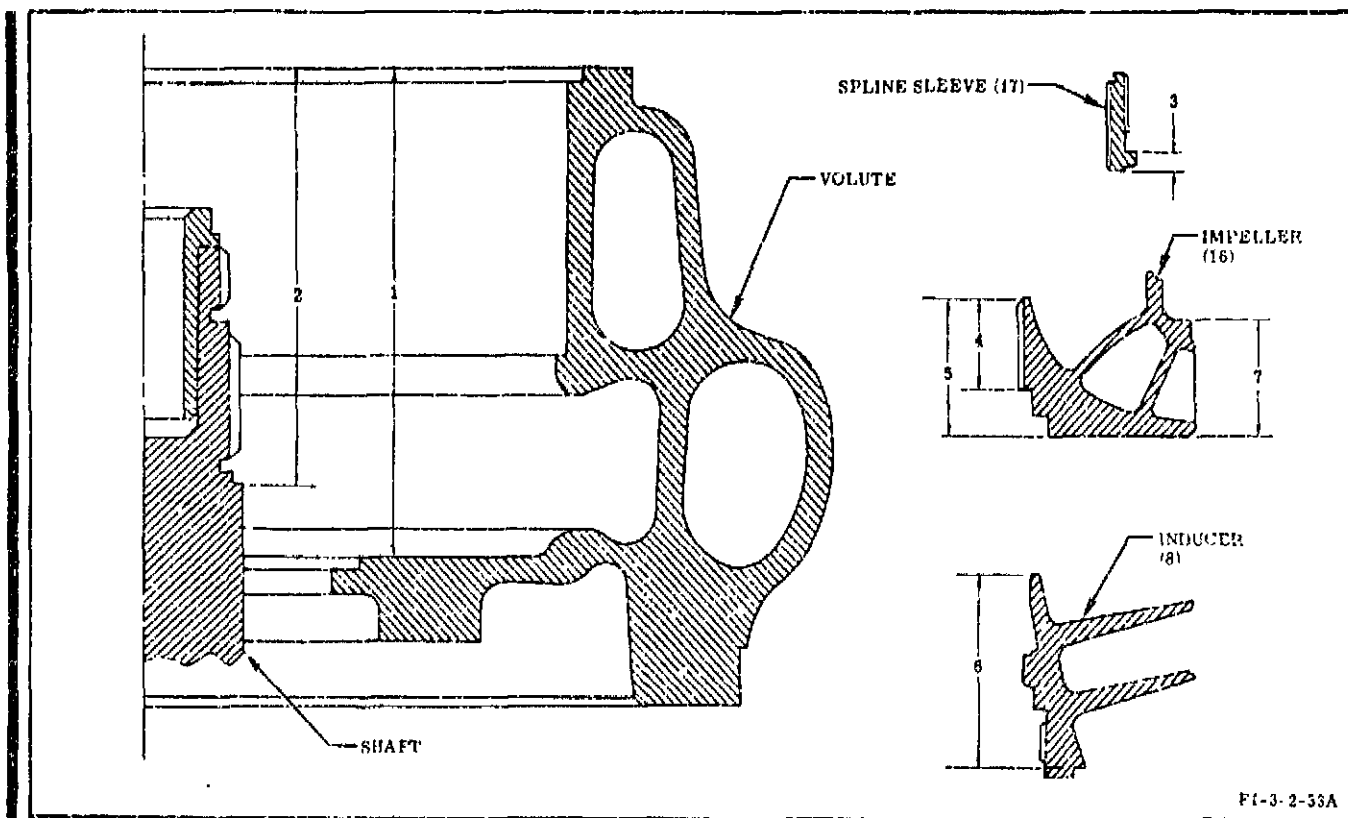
Measuring Oxidizer Turbopump Dimensions
